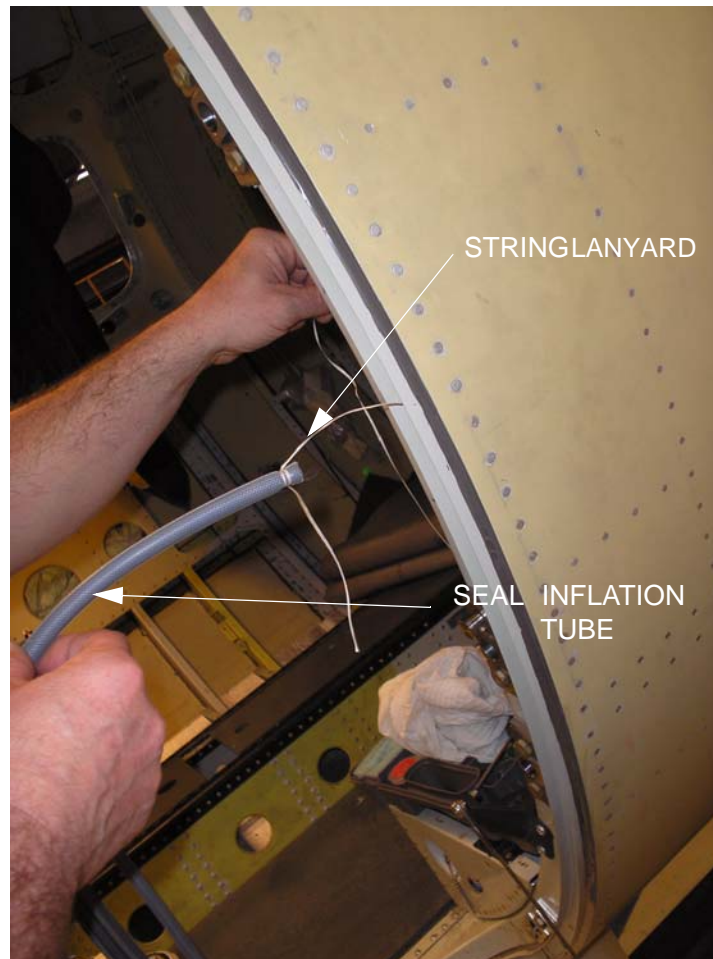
Upper Cabin Door Seal - Installation (Sheet 2 of 6)
